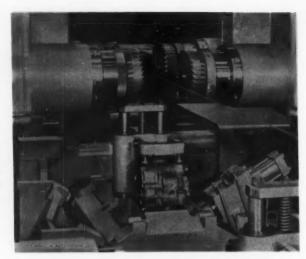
These cutters are independently mounted in this transfer machine, but each spindle has to be adjusted to accurately set the over-all length of the work-piece. Adapters make setting a simple operation.
